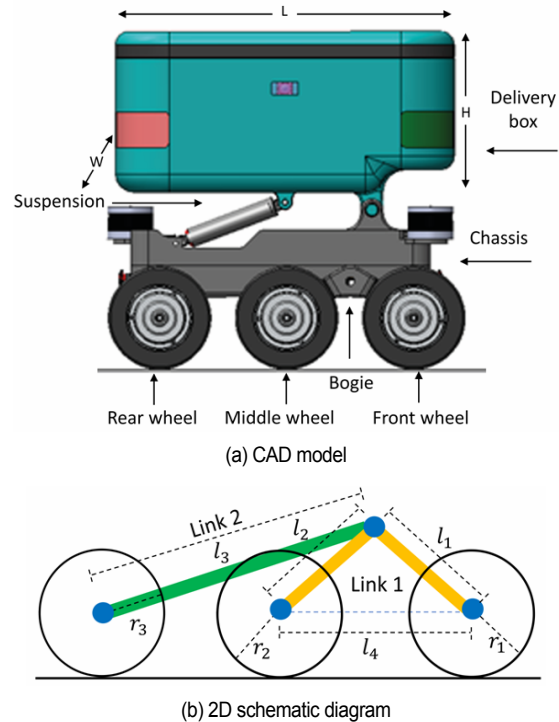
Robot design: (a) CAD model of DeepExpress mobile robot by KETI; (b) 2D schematic diagram of the robot mechanism.
